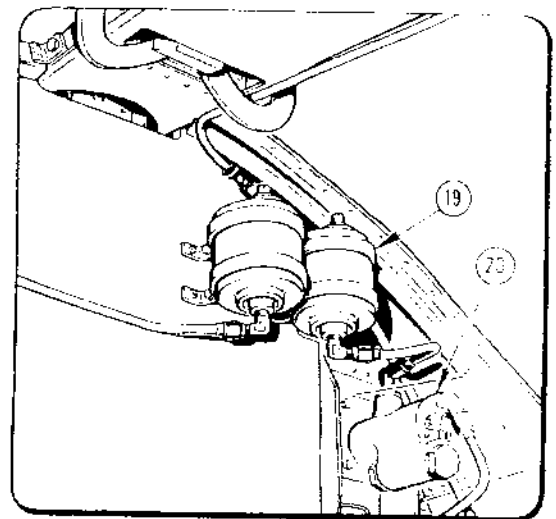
Brake Master Cylinder, Serial Nos. AF44-85337 and Subsequent
